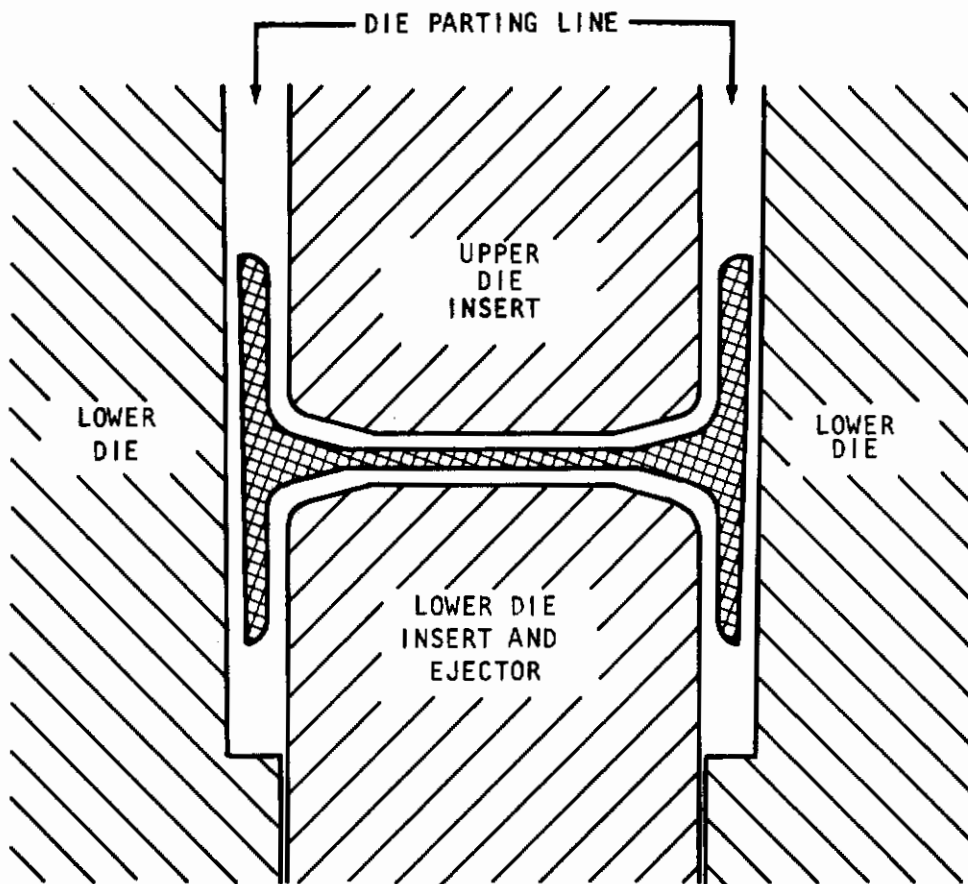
Schematic illustration of Fin Rib Cross-Section (at approximately mid-length) with Finish Forging Die Impression for 6000 Ton Hydraulic Press Superimposed to Target Closure. Approximately Full Scale.
